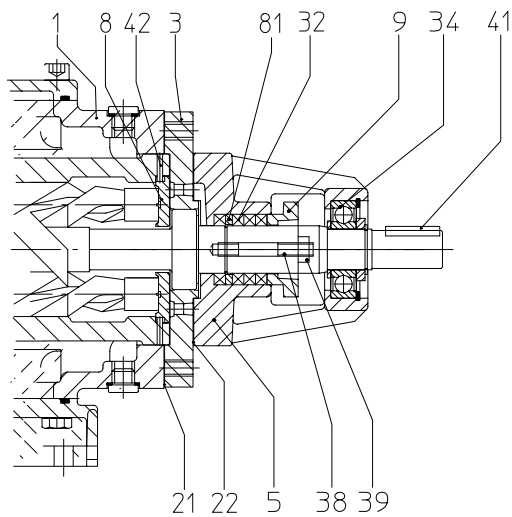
SN..ER..KA2, external bearing, incapable of relubrication, gland packing, version with angular bearing
